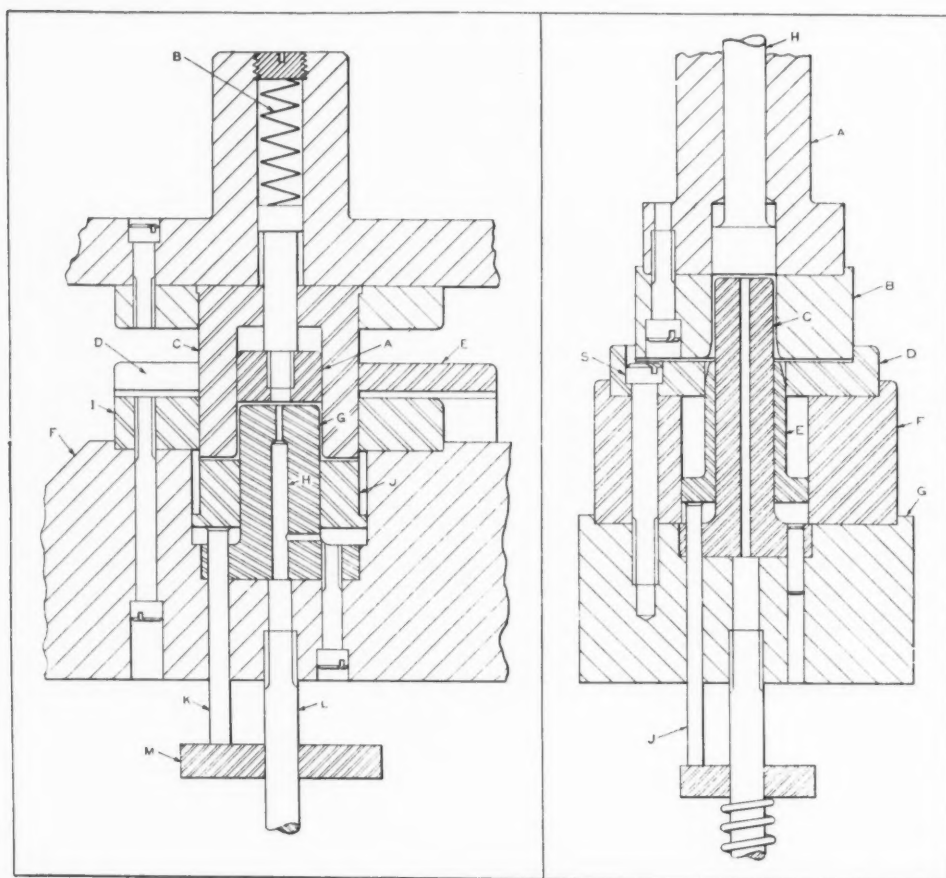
(Left) Blanking and Drawing Die for First Operation in the Production of Conical Shell from Cold-rolled Steel
